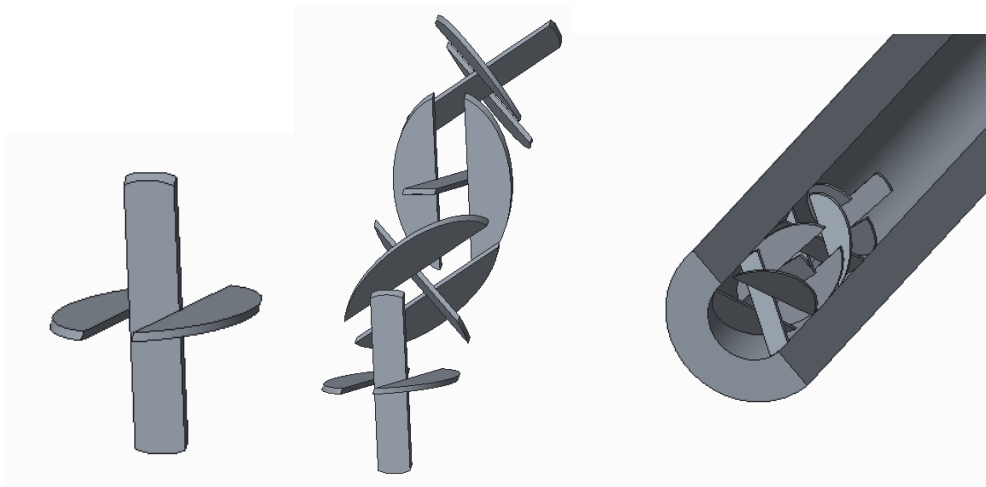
Triple Plate (a) single element (b) element chain (c) static mixer
